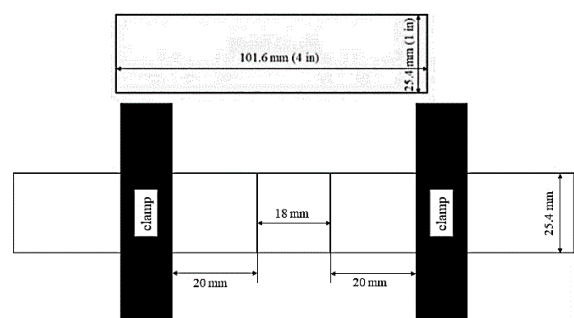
Schematic size of cut standard samples and welding site schematic
